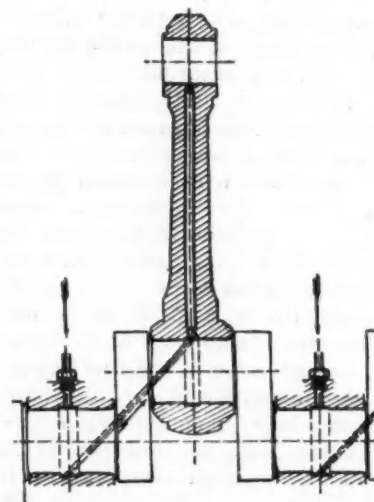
SYSTEM OF LUBRICATION ESPECIALLY ADAPTED TO HIGH-SPEED ENGINES
